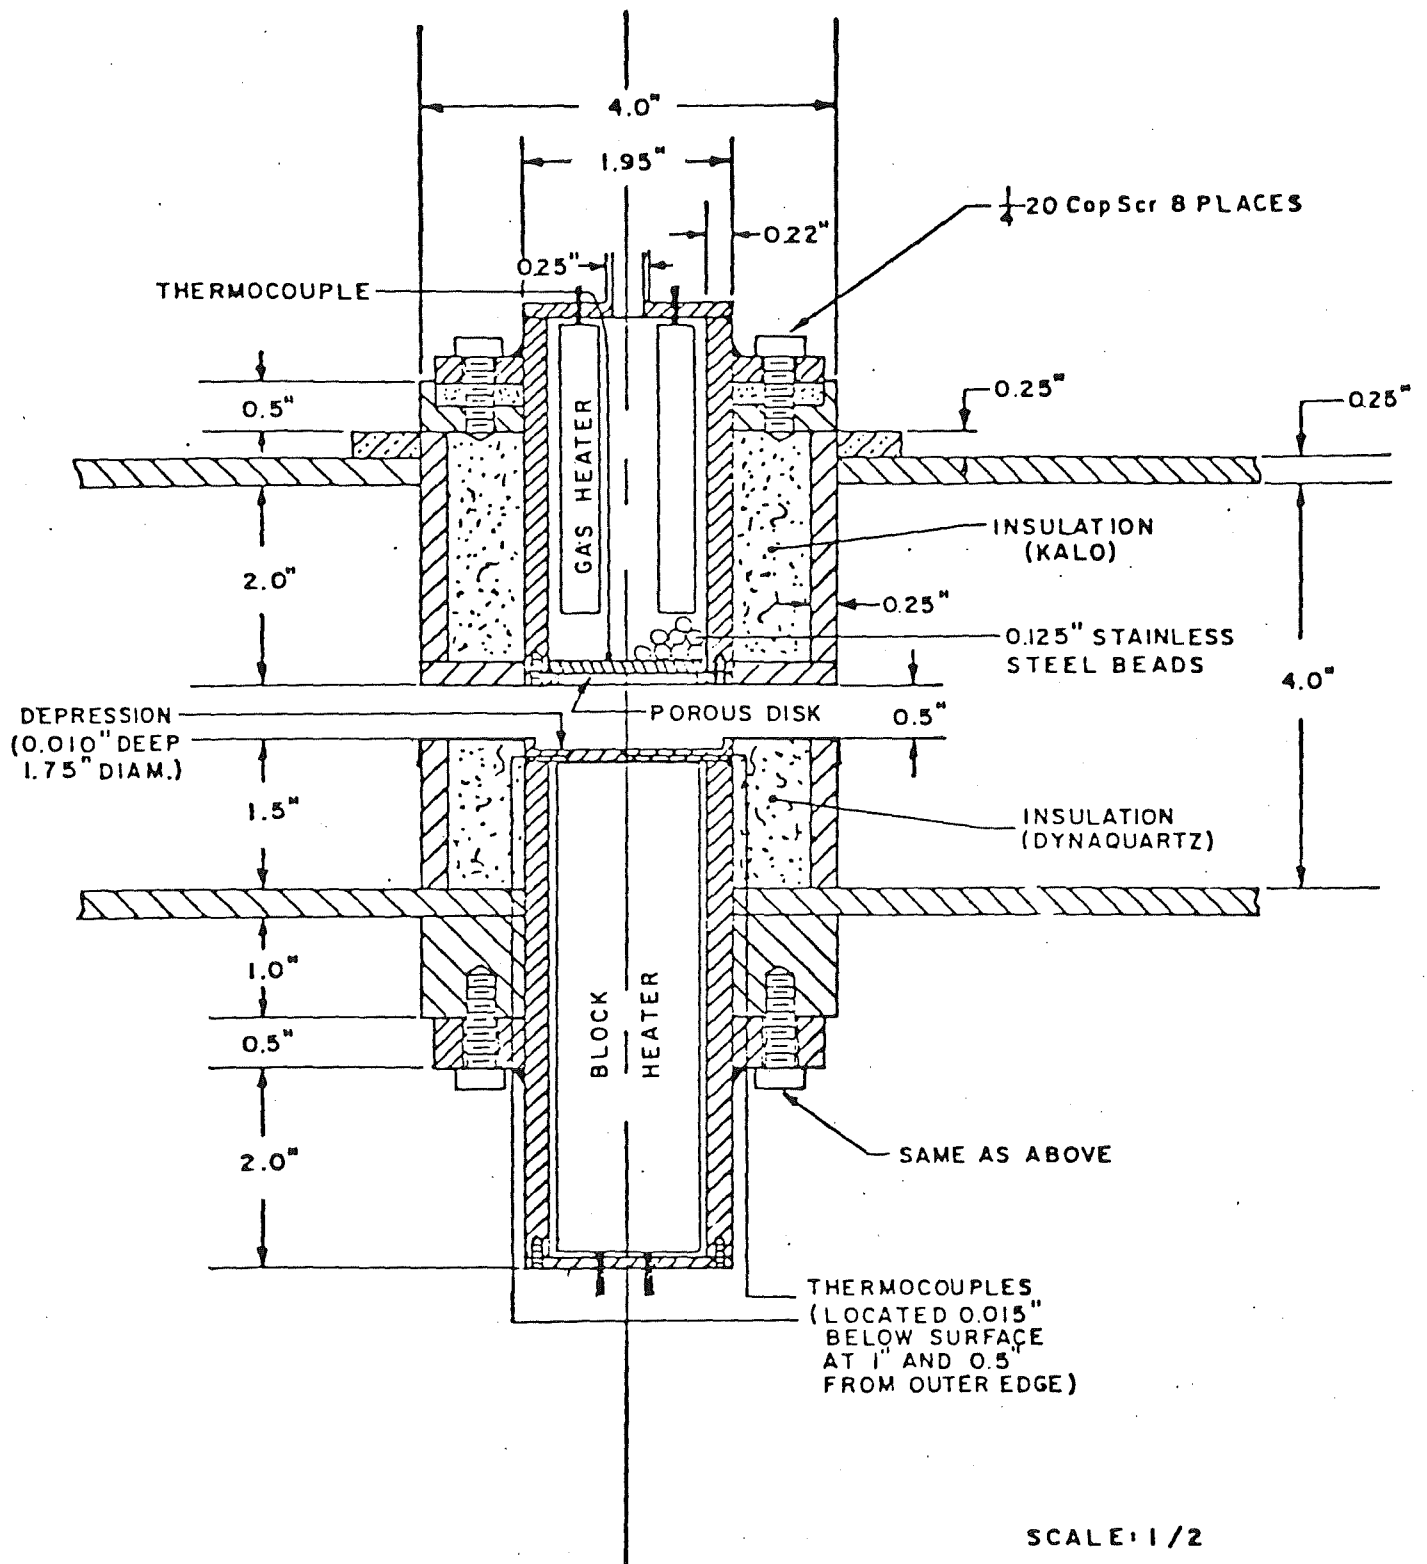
Detailed Drawing of Stagnation Zone with Gas and Block Heaters
